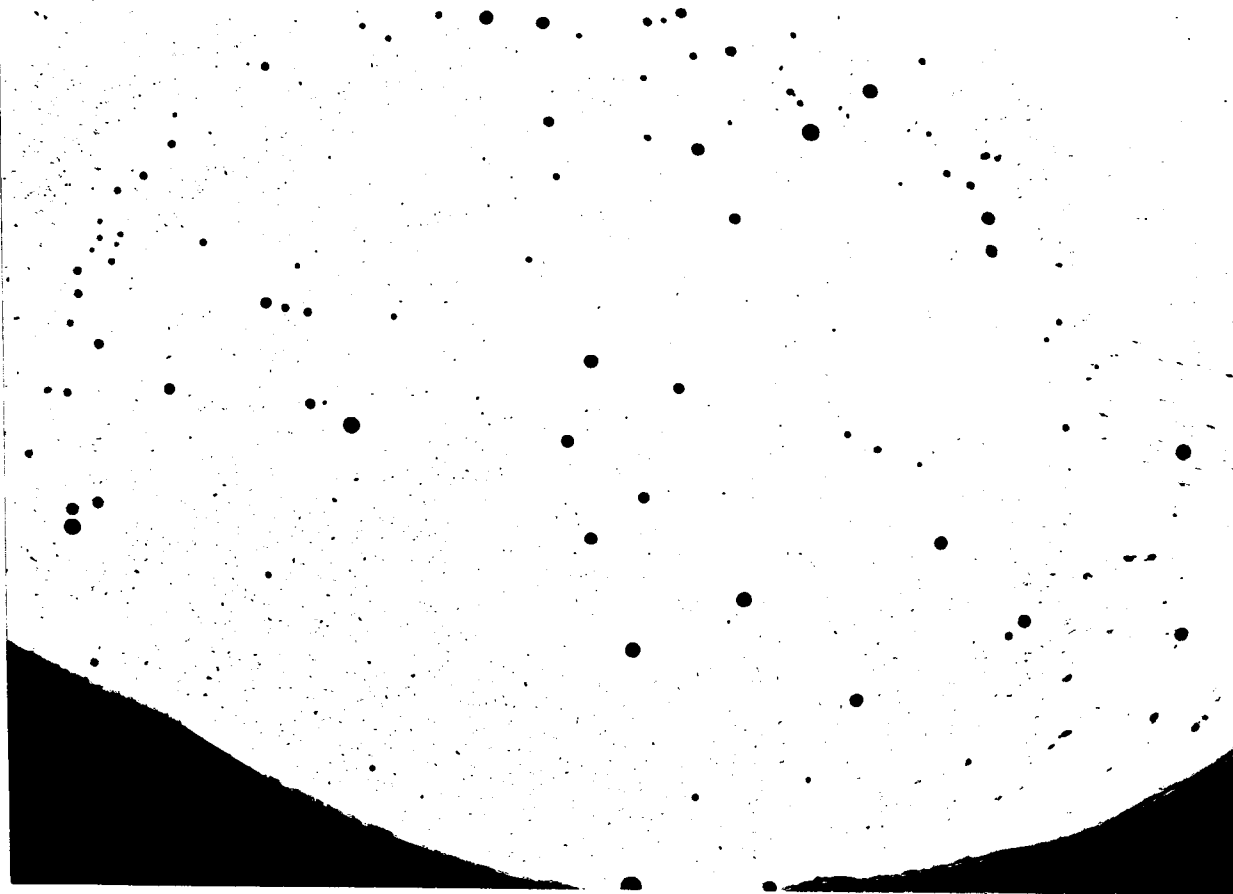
TYPICAL CROSS SECTIONS OF WELDS WITH X4043, TYPE 4 FILLER WIRE
